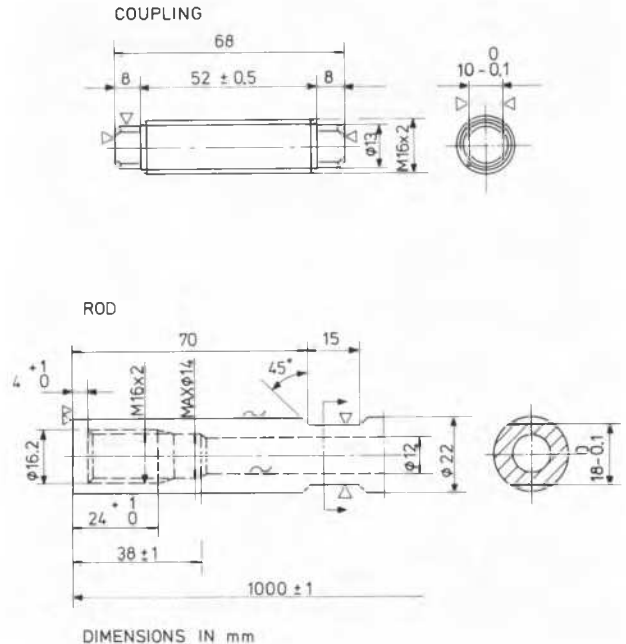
Recommended tolerances for manufacture of weight penetrometer rods and couplings.
